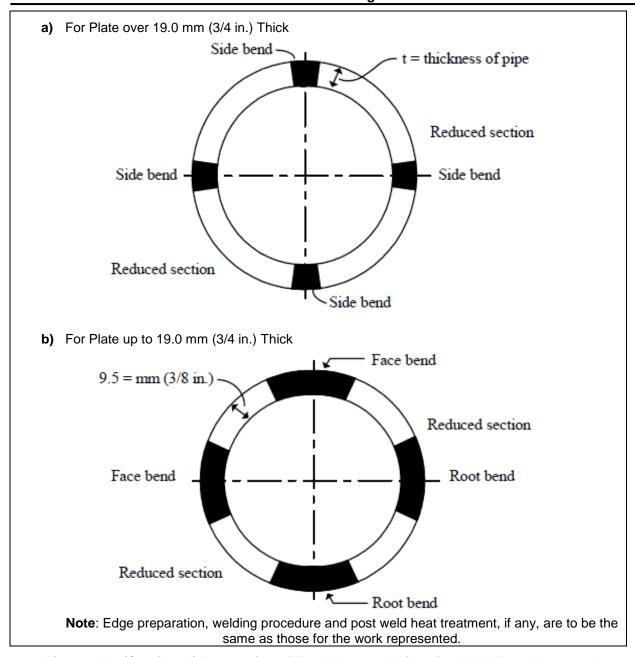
(Continued) Preparation of Test Plates and Pipes for Weld Tests Nos. 1 and 2
